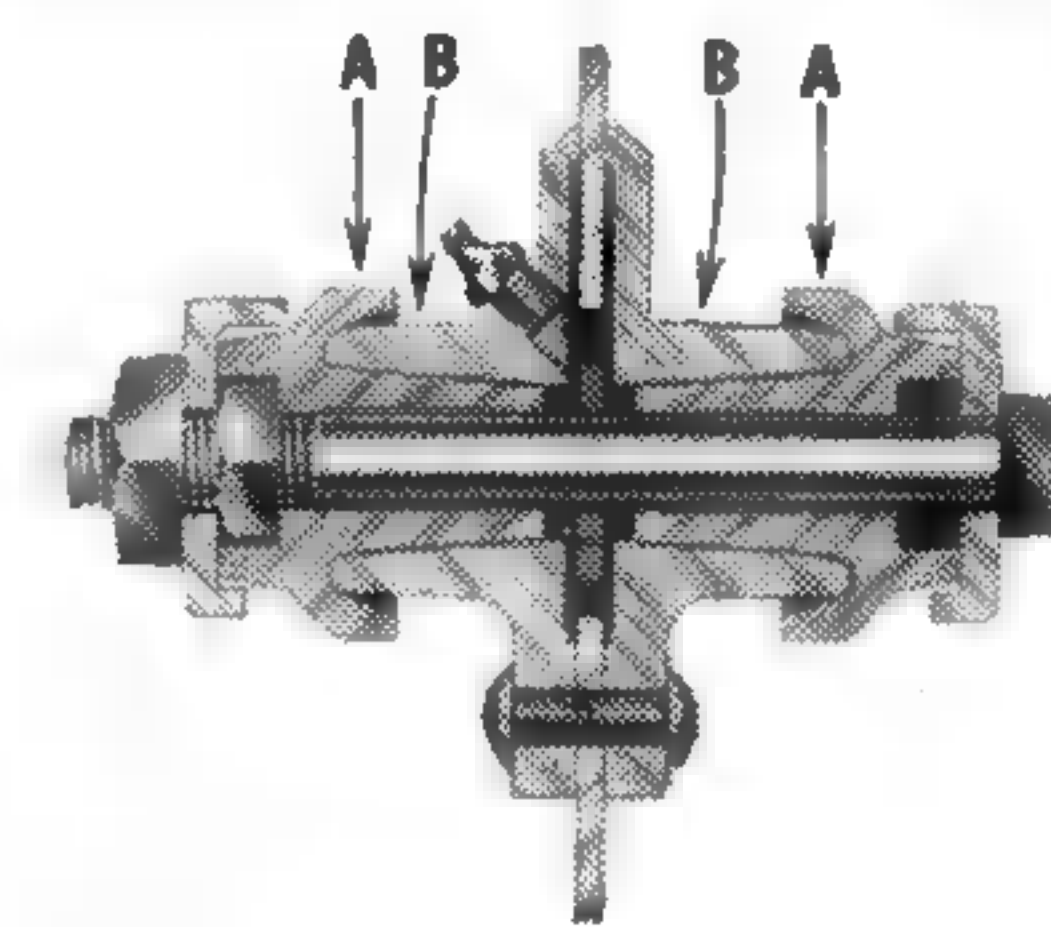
Cross-sectional view of adjustable rolling couler bearing with adjustable sleeves indicated at "A" and "B."
